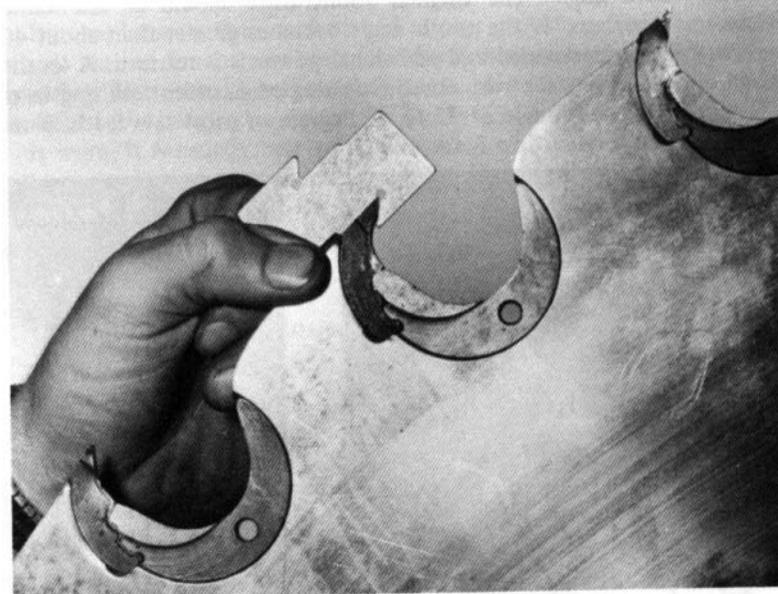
Tooth angle can be checked easily with a tooth angle gage.
